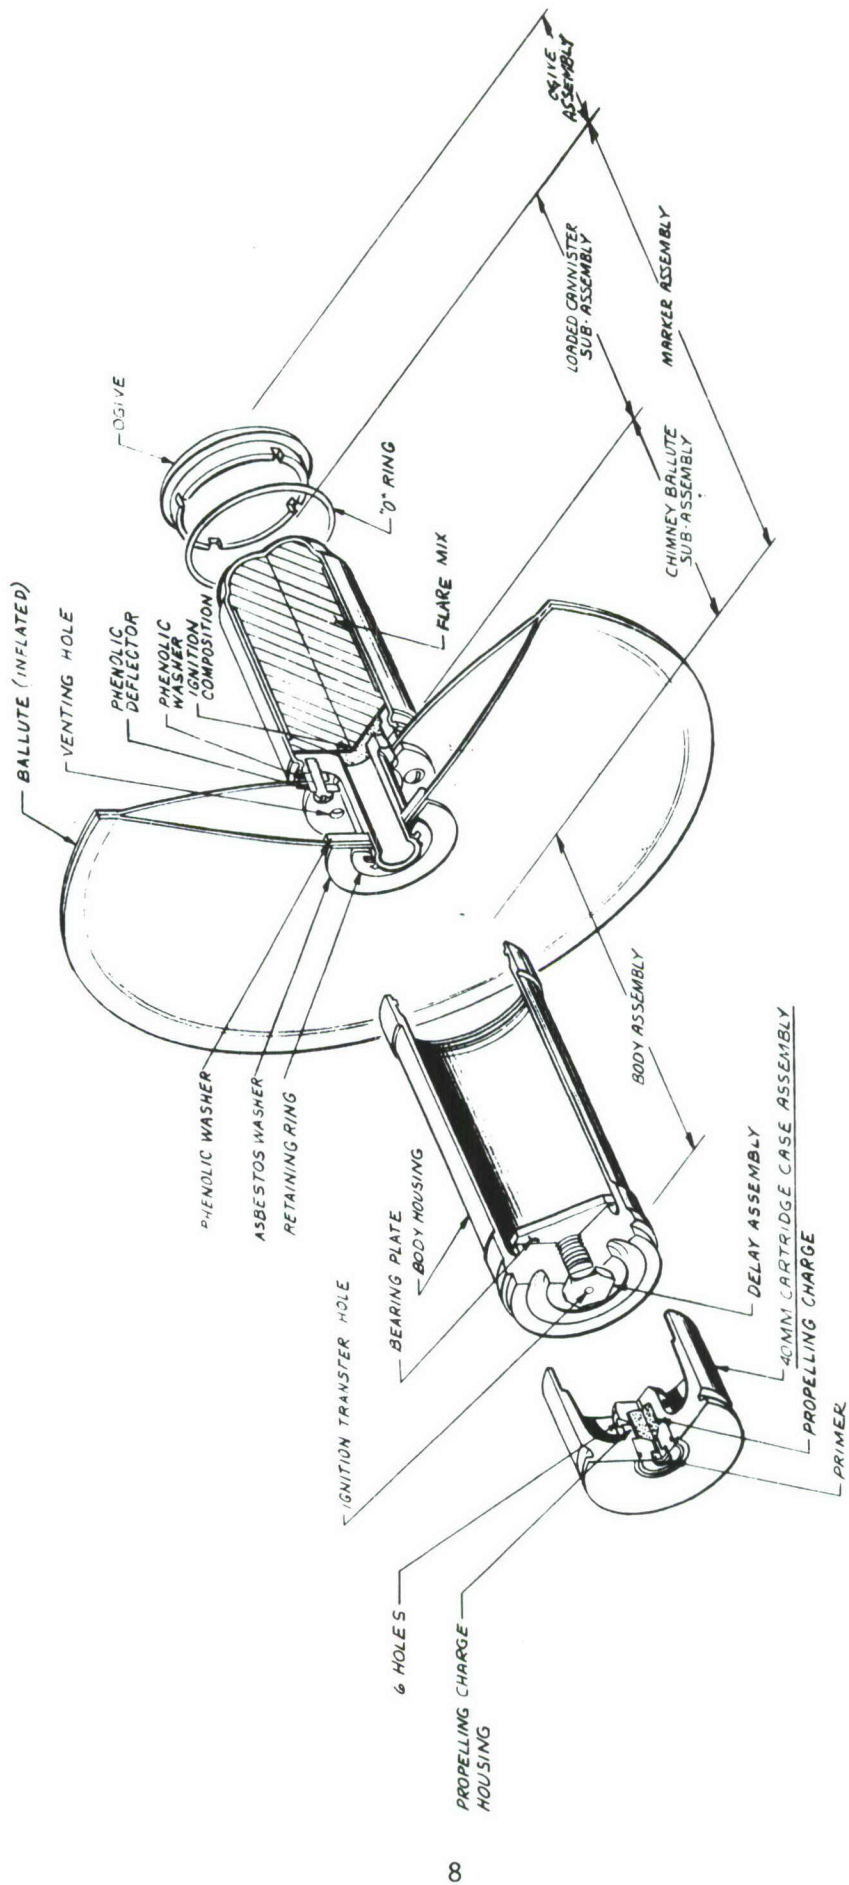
Exploded View, 40mm Floating Flare Cartridge
